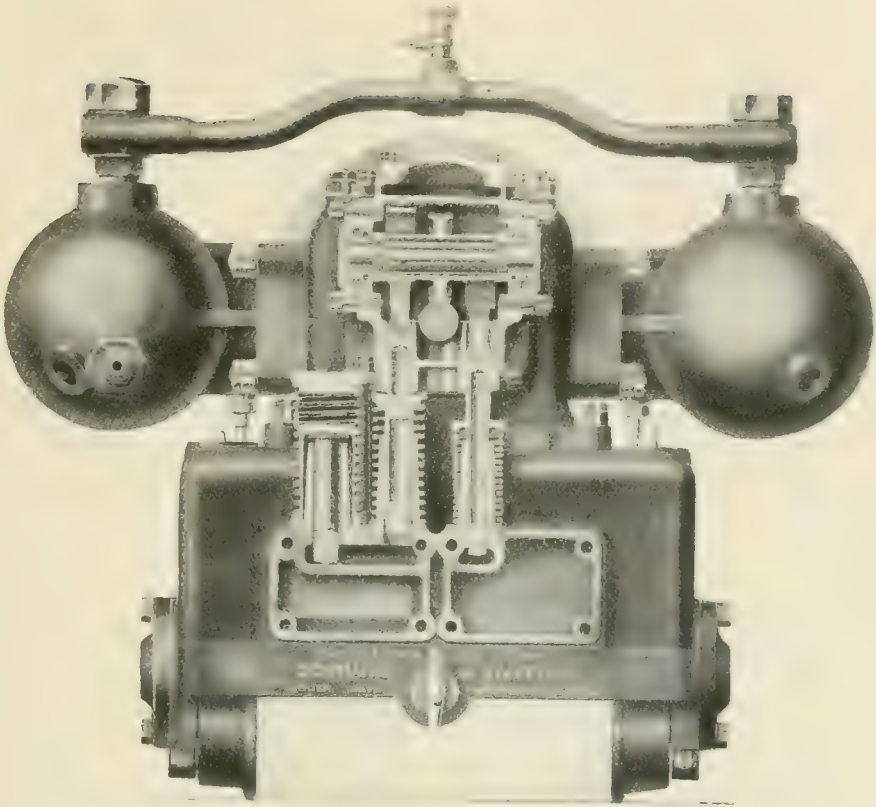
SECTION OF THE GENERATOR THROUGH THE PUMP GEAR BOX
